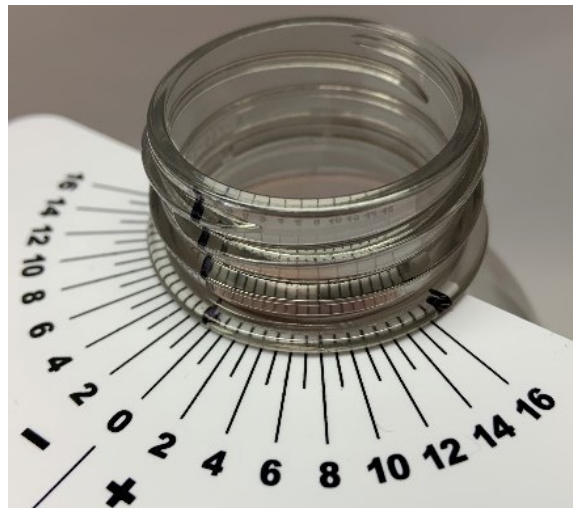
Proper bottle finish pull-up mark degree check on a 78° bottle finish.
